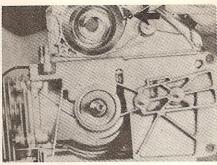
The outer end of rewind spring should be located between lugs on air box. Hooking end over outside lug may break the lug off.
